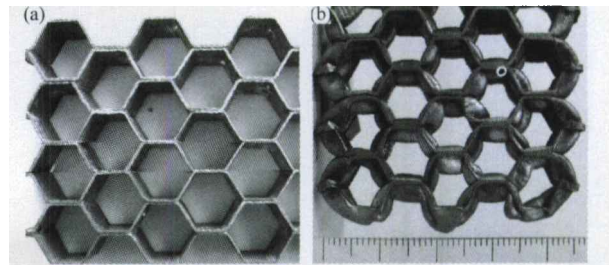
Top view photographs of specimen T1 before and after testing: (a) undeformed shape before testing; (b) deformed shape after testing.
